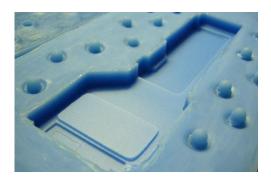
Picture showing rubber mold for resing casting
